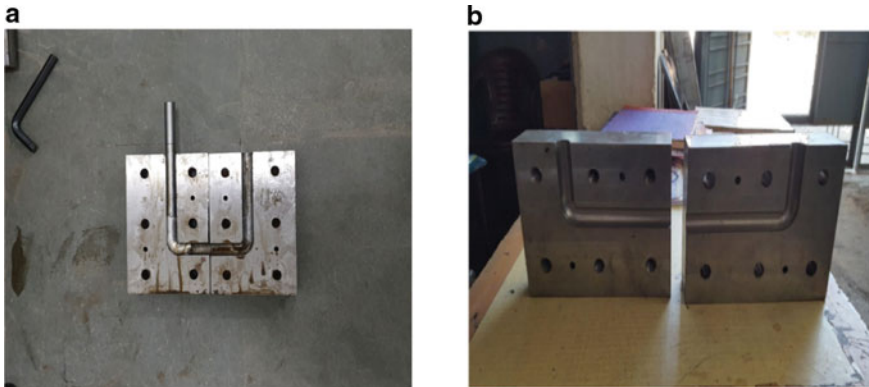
a Top view of both the parts of a die, b front view of both the parts of the die
